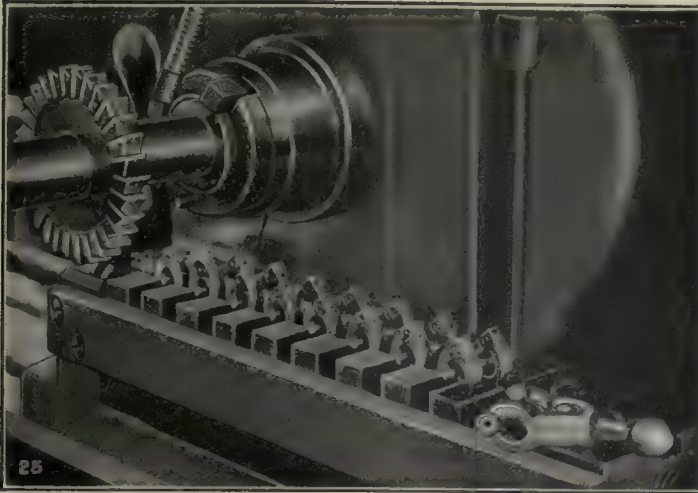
MILLING INSIDE FACES ON CONNECTING-ROD BEARINGS. FIG. 26—STRADDLE-MILLING A CONNECTING ROD
